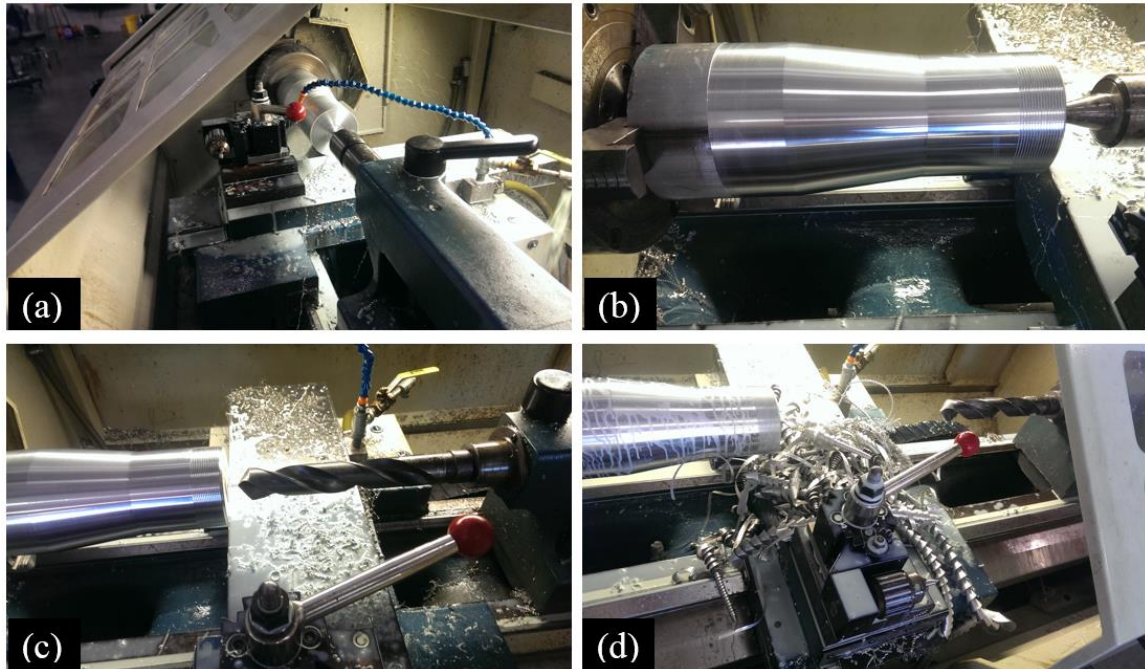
Selected images of CNC machining processes including turning (a), threading (b), and drilling (c and d).
